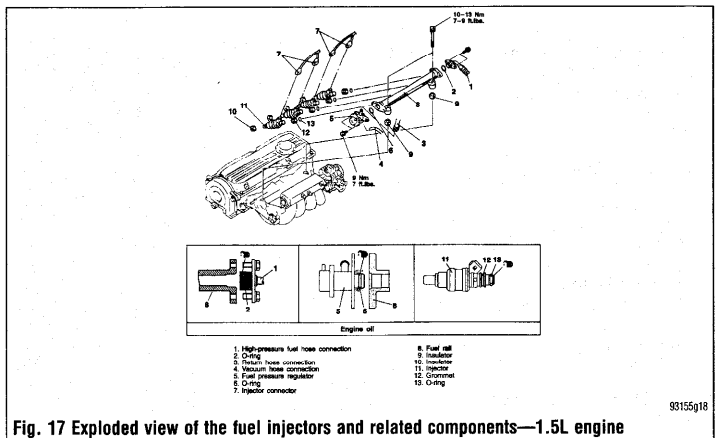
Exploded view of the fuel injectors and related components—1.5L engine
